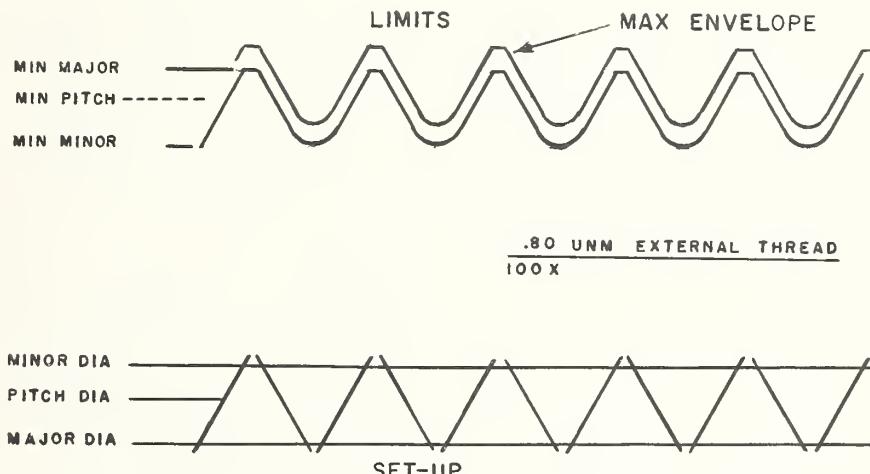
Suggested chart for projection inspection of external Unified Miniature threads.
